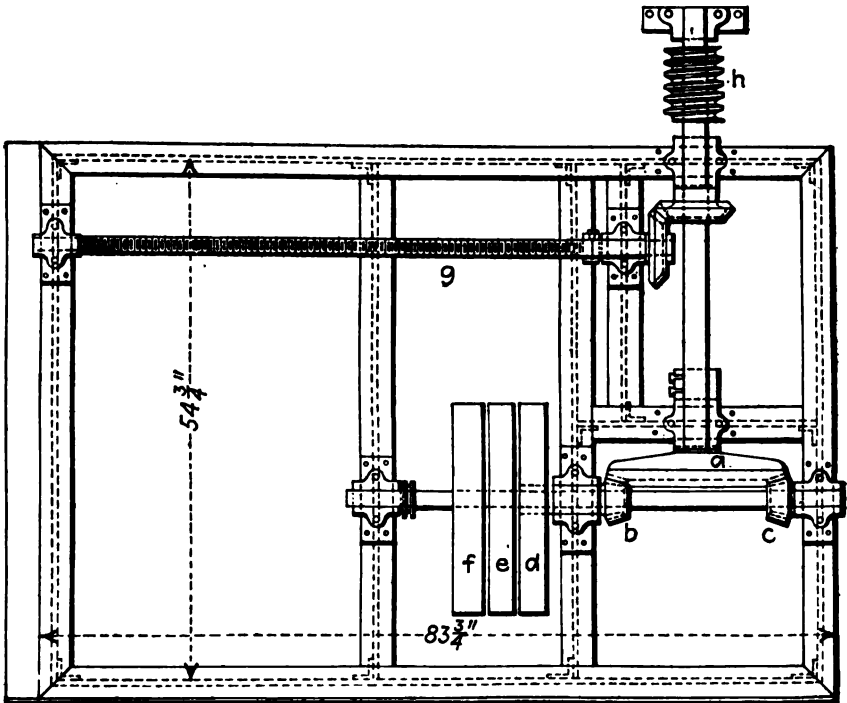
Reversing-gear shift. *a*, Bevel gear; *b*, *c*, pinions; *d*, *e*, *f*, pulleys; *g*, threaded shaft; *h*, worm gear.
